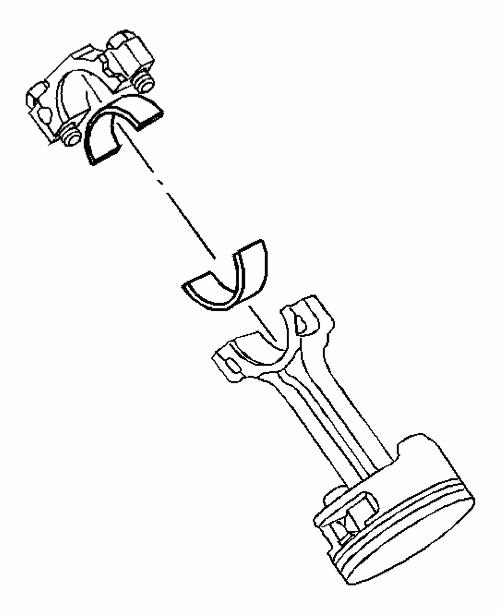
View Of Piston, Connecting Rod, Bearing Cap, Bearing Halves & Bolts Courtesy of GENERAL MOTORS CORP.
